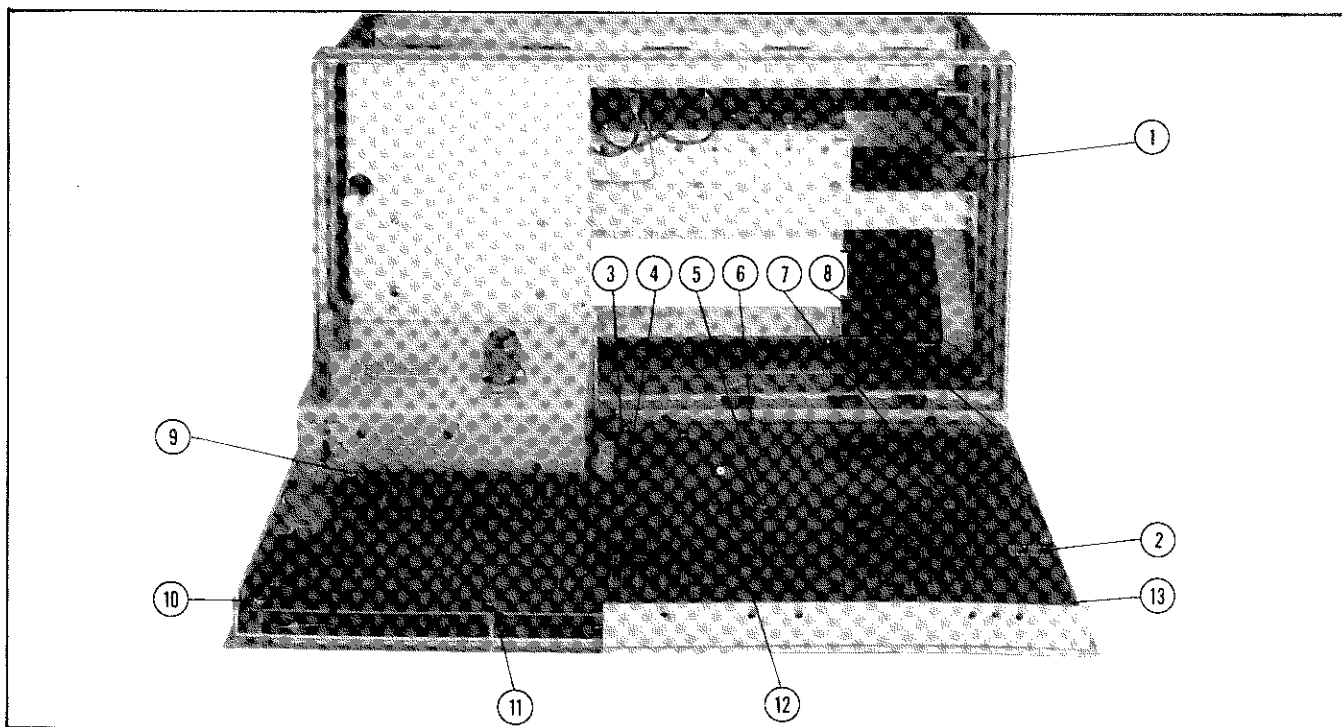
A22 Display and Keyboard Control Board Disassembly.
